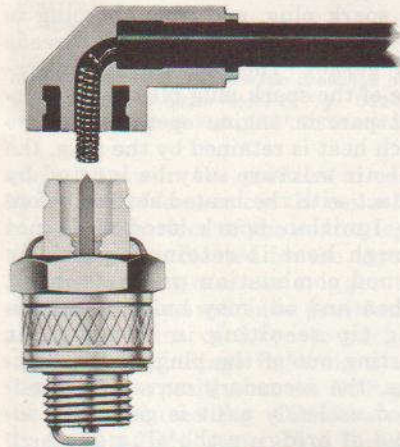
Cut-away view of special "shorty" type spark plug and terminal available for chain saw engines. Refer to Fig. CS35 for a second type special plug.
